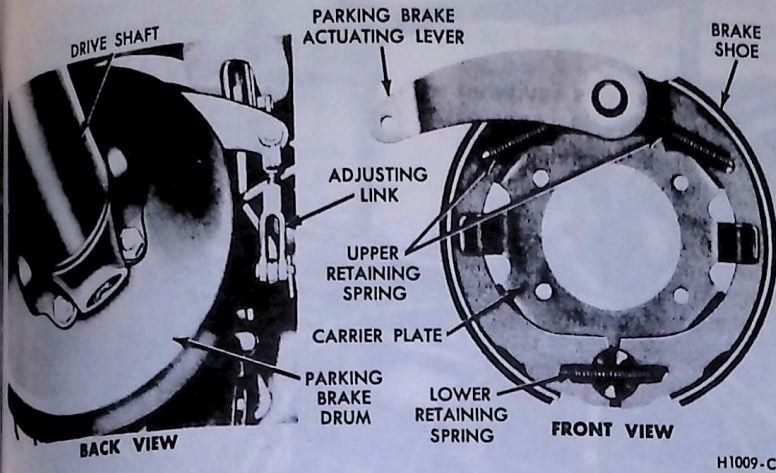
Transmission Mounted Internal Shoe Type Parking Brake—9 Inch
